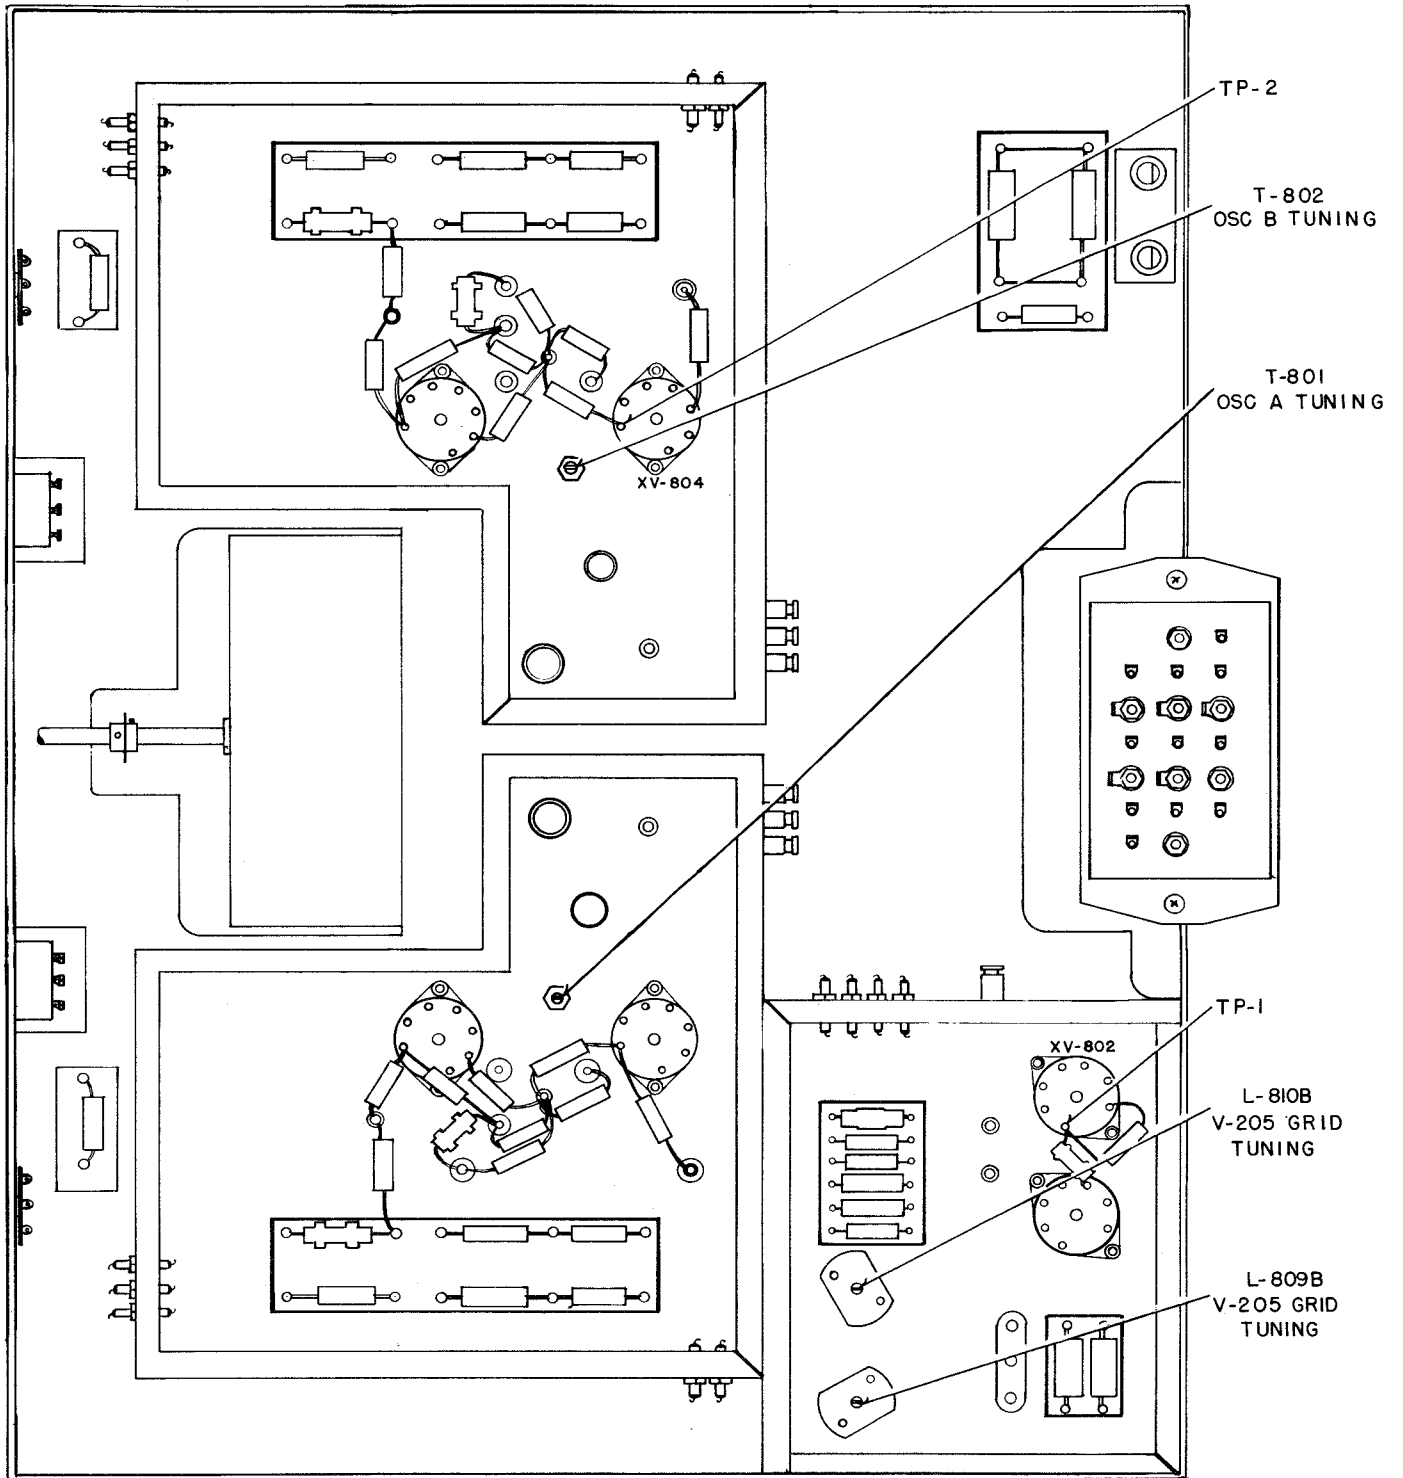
Alignment Adjustment and Test Point Locations Bottom of Chassis, Oscillator Assembly O-131/FRR-24
